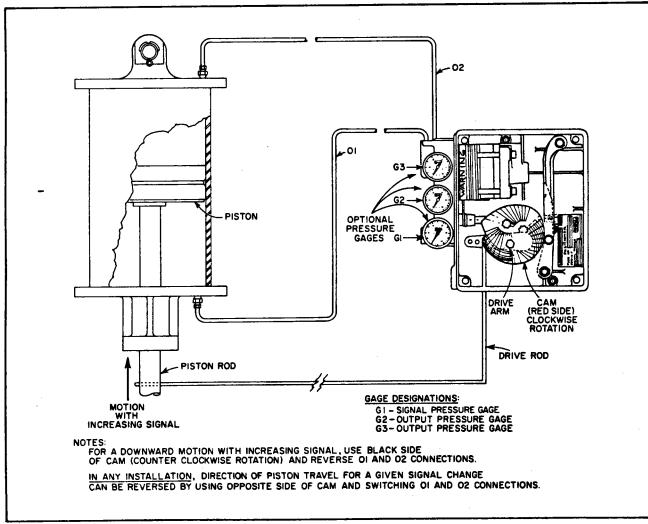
Typical Positioner Installation Mounted on Double-Acting Cylinder 1.2.23-470.
